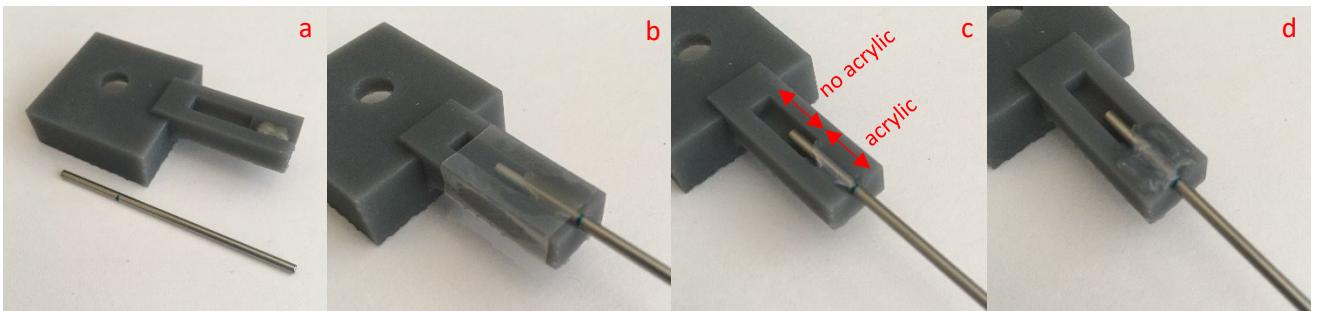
Attaching the spout tube to the mount. a) mark tube at 1.5" b) fill triangular area with dental acrylic, insert tube at 1.5", and cover with tape c) cure and remove tape d) add extra dental acrylic and cure
